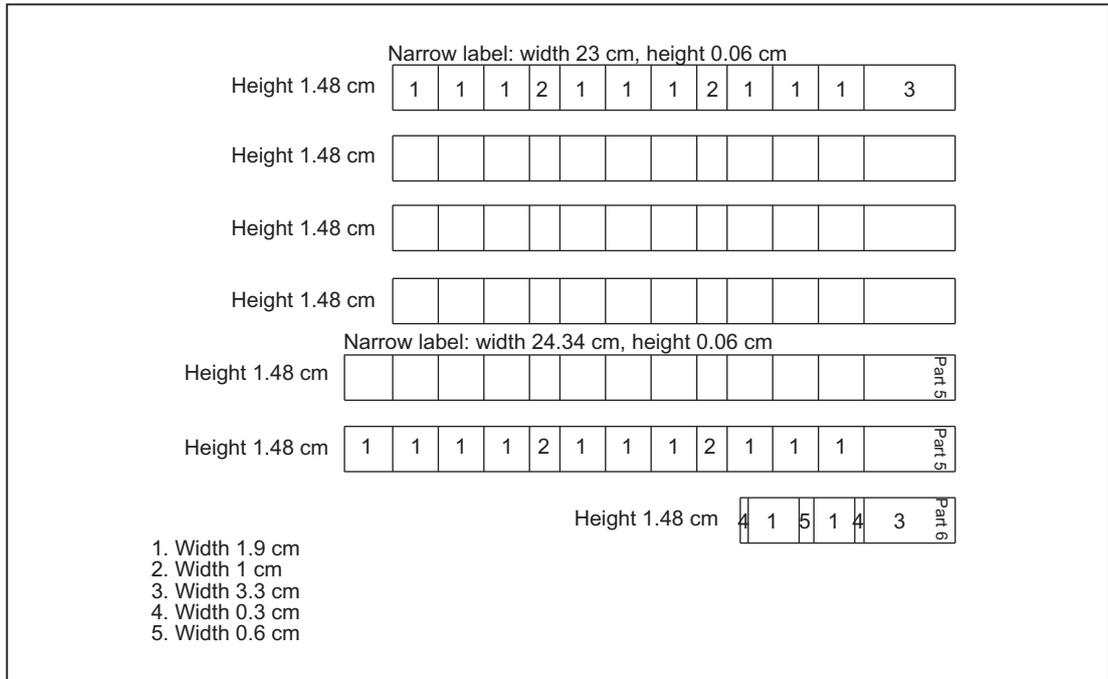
Dimension drawing for slide-in labels for MCP 483
